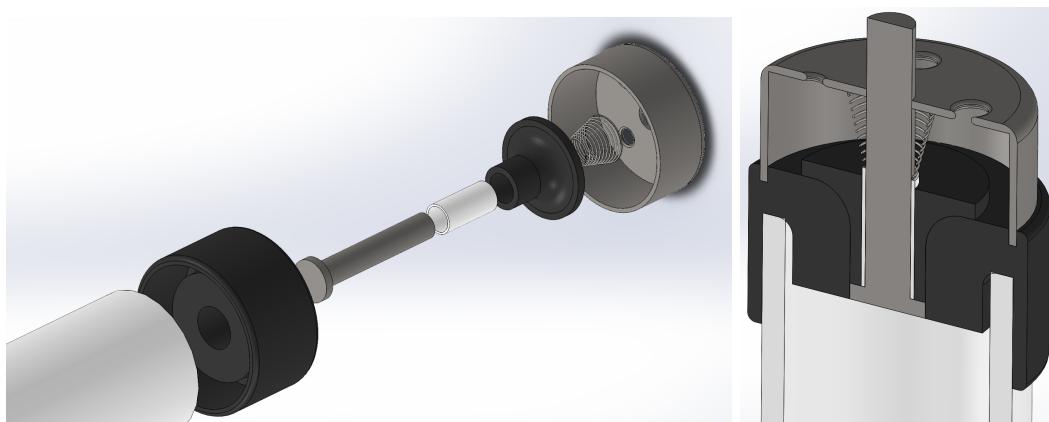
Left: Exploded view of initial coring head design. Right: Sectioned view of design.
